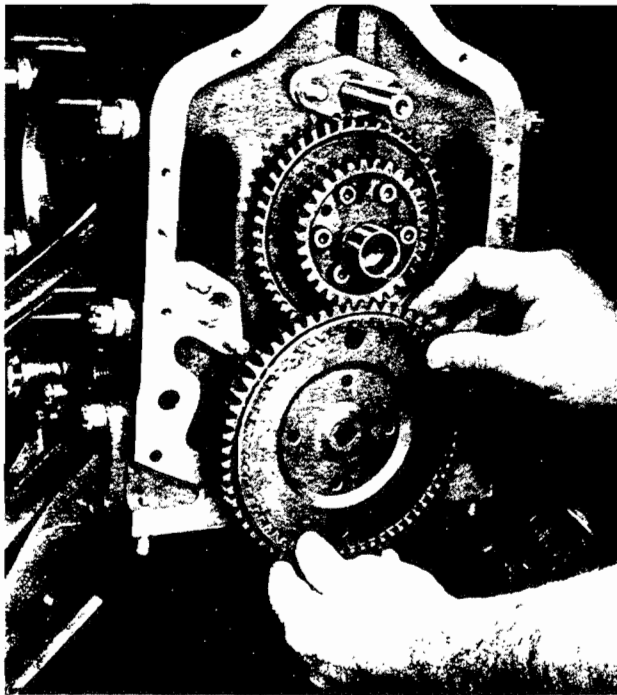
INSTALLING CAMSHAFT GEAR.
